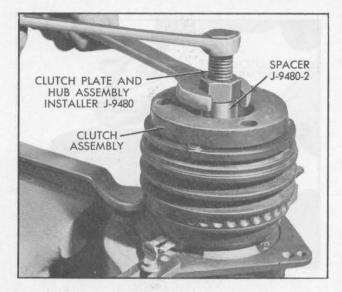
Installing Clutch Plate and Hub Assembly
